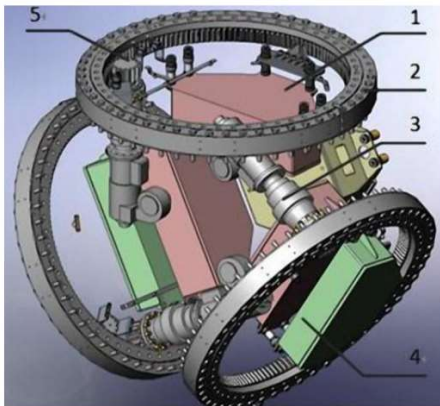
Pitch system [4] (1) Pitch controller. (2) Slewing bearing. (3) Pitch motor. (4) Battery cabinet. (5) Gearbox.
